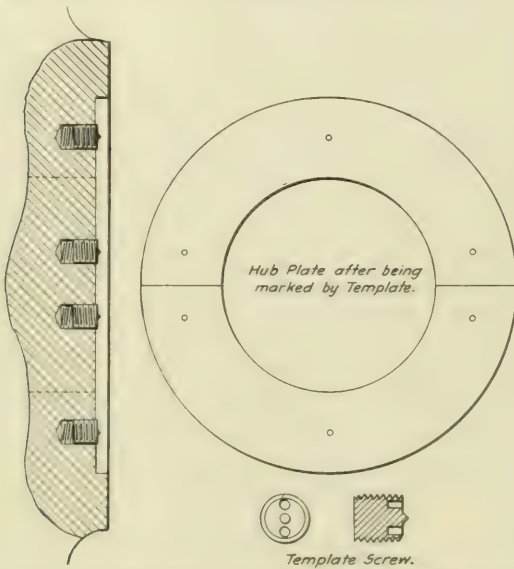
Template for Marking Centers for Drilling Hub Plates.
